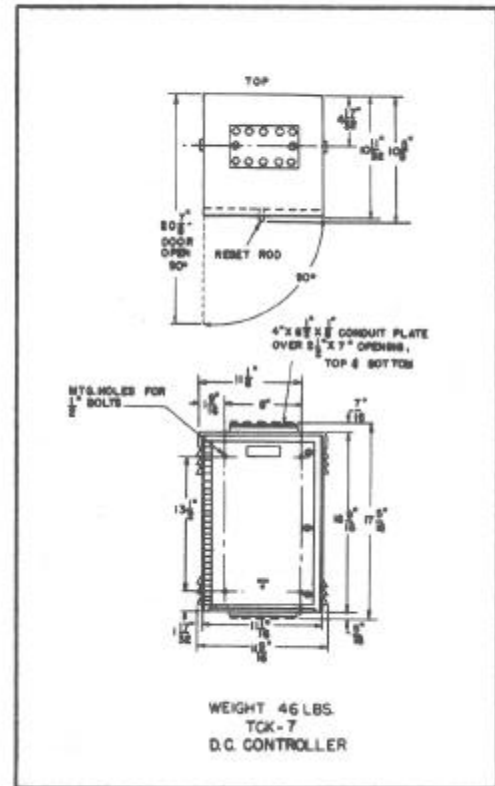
Outline Drawing of D.C. Magnetic Controller for TCK-7
